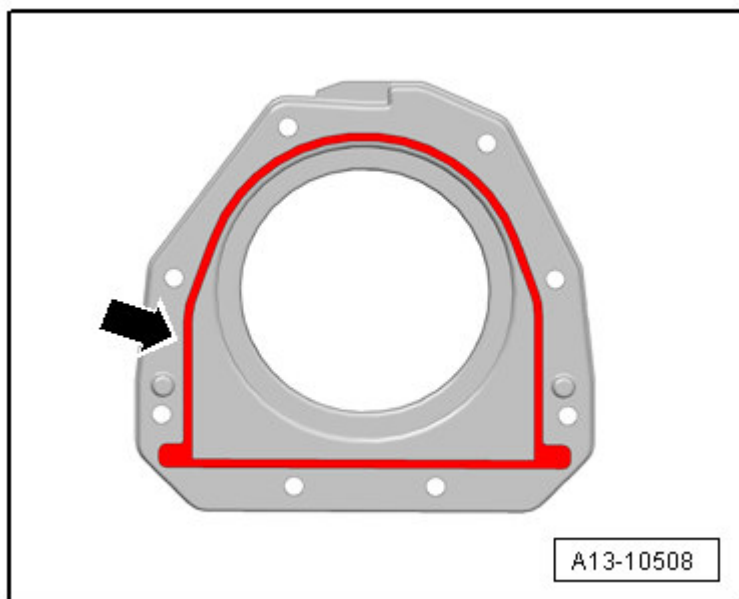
Identifying Silicone Sealant Applied On Cover Sealing Surface
